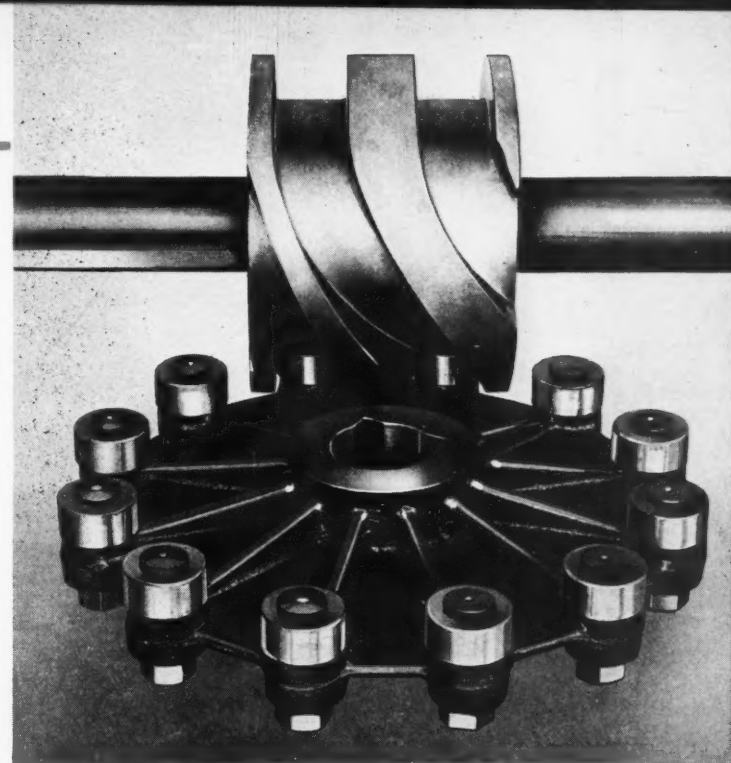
Drum cam used in cigarette packaging machine to index and actuate the compressor turret. Twelve roller followers are used with this cam to operate connected mechanisms
